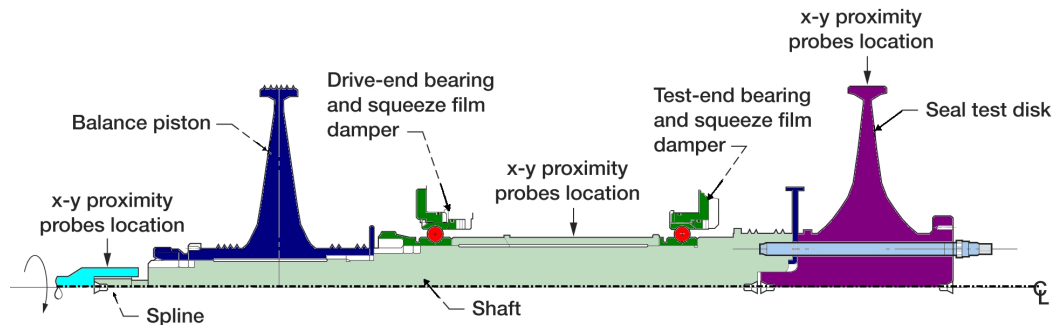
Seal Test Rotor Showing X-Y Proximity Probe Locations
